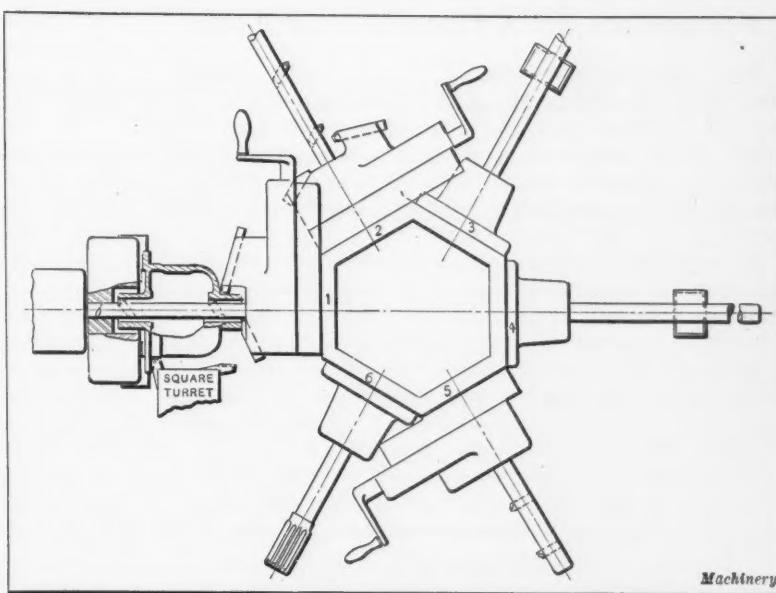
Lay-out of Tooling Equipment for machining Differential Housings
